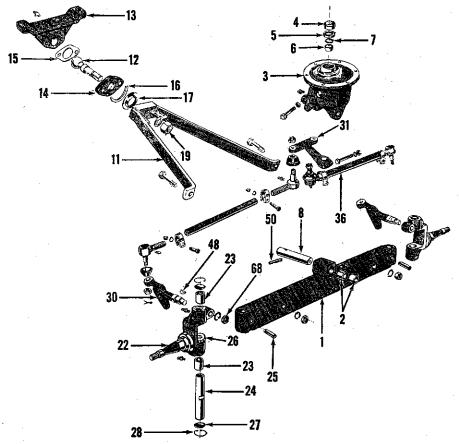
Exploded view of the standard non-adjustable front axle used on series 333 and 444 tractors. 444 Rice models are similar except for the differences shown in Fig. MH757. Only manual steering tractors use parts (4, 5, 6 and 7). Refer to Fig. MH754 for legend not listed below.
